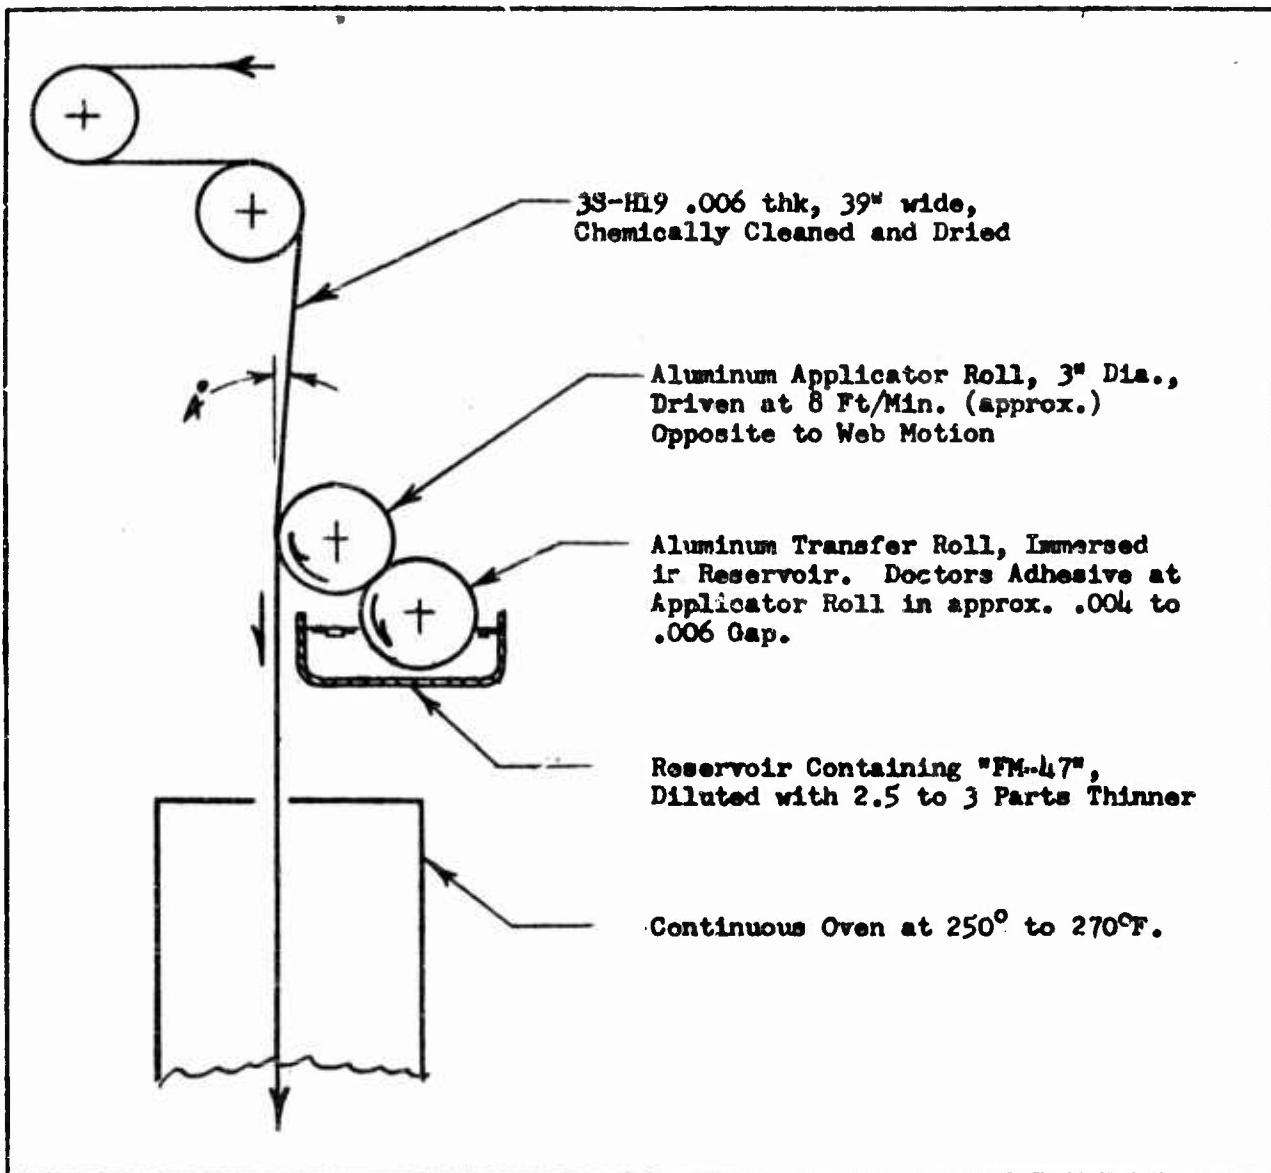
Schematic of reverse-roll coating system, used to apply a dilute "FM-47" prime coat to one side of 39 inch continuous strip of 3S-Hl9 foil, 0.006 inch thick. Although coating was smooth, uniform, and did not extend around the edges of the strip, the applicator roll tended to dry up under continuous use. This condition could have been minimized by enclosing the roll assemblies in a hood, and could have been eliminated by immersing the applicator roll in the reservoir. (The latter modification could not have been carried out with the strip passing downward, as shown here.)
